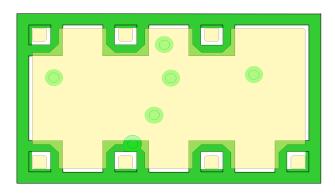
Solder Mask Superposed on ACFM-7103 Bottom Metal Pattern. (top view)
